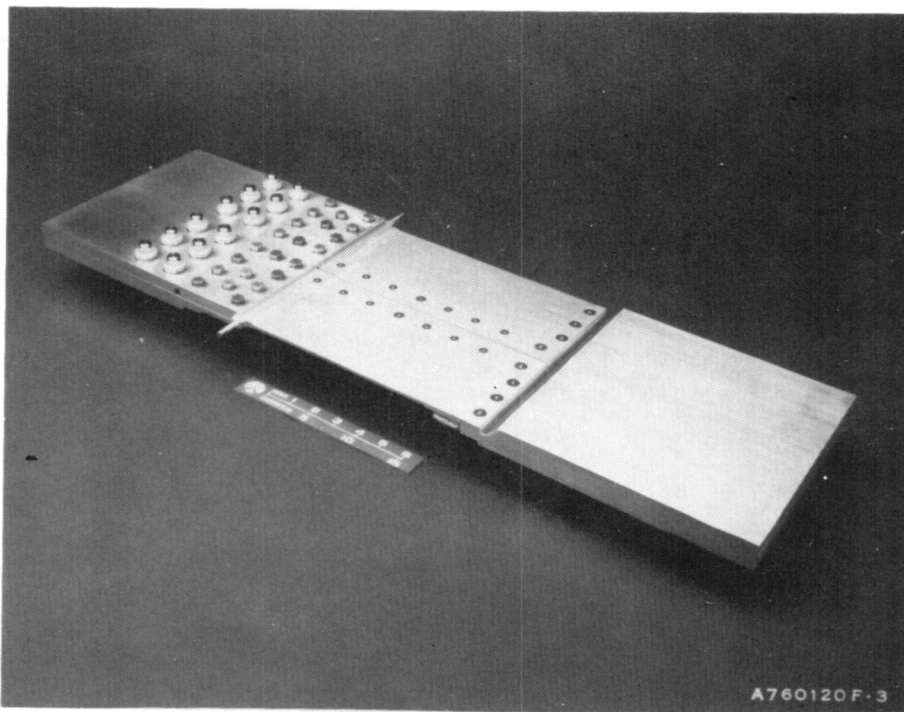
PCS Moldline Side of Completed Fatigue Specimen. Small Dent in Skin Developed during Straightening.
